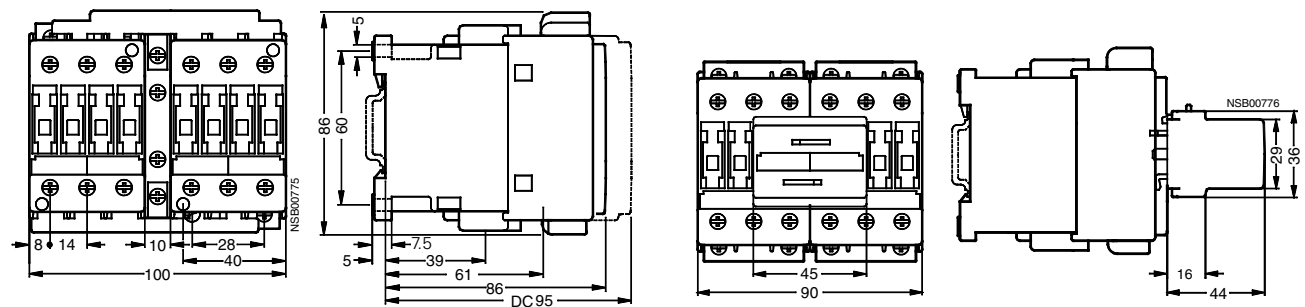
Contactor combination for reversing (frame size S0) with mechanical interlock at the side (3RA19 24-2B)
